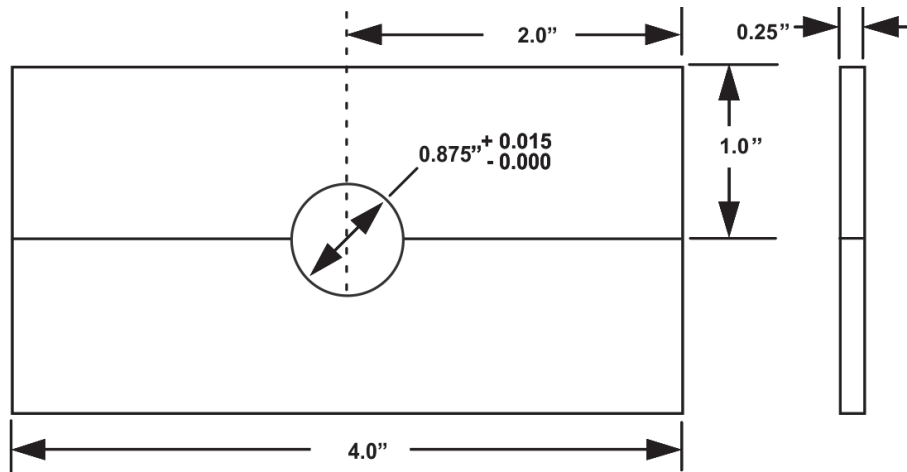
Fabricated Support Bars (Cold Rolled Steel) - Drive End Bearing
